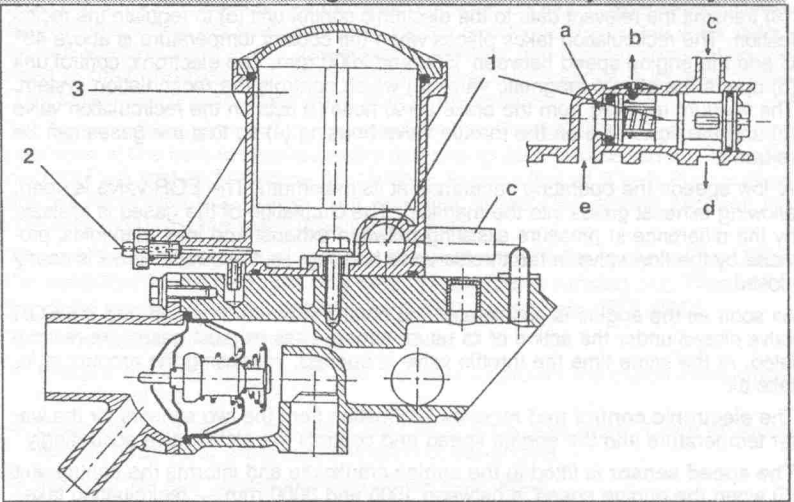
Sectional view of the fuel filter and fuel heating system.
